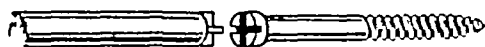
Screw of stainless steel with a modified Phillips head and screw driver to fit.
